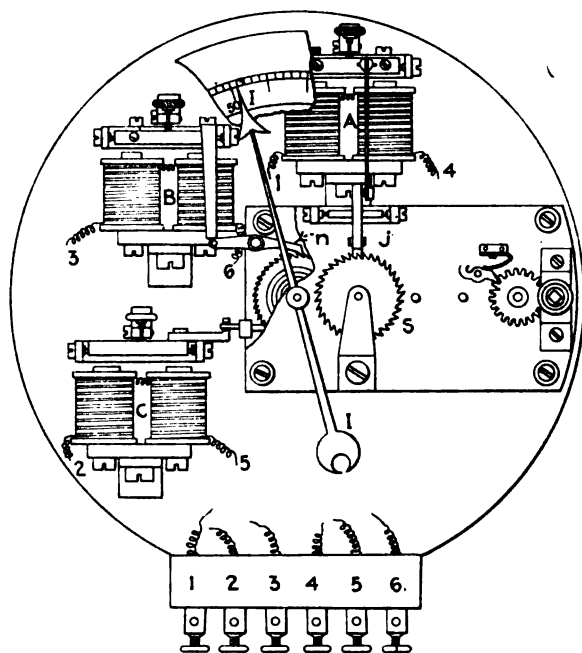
INTERIOR VIEW OF SPEED AND DIRECTION INDICATOR
